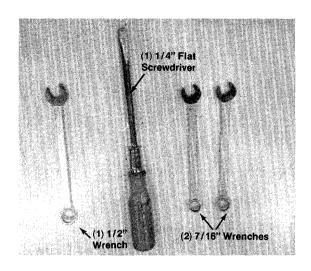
TOOLS REQUIRED FOR ASSEMBLY
